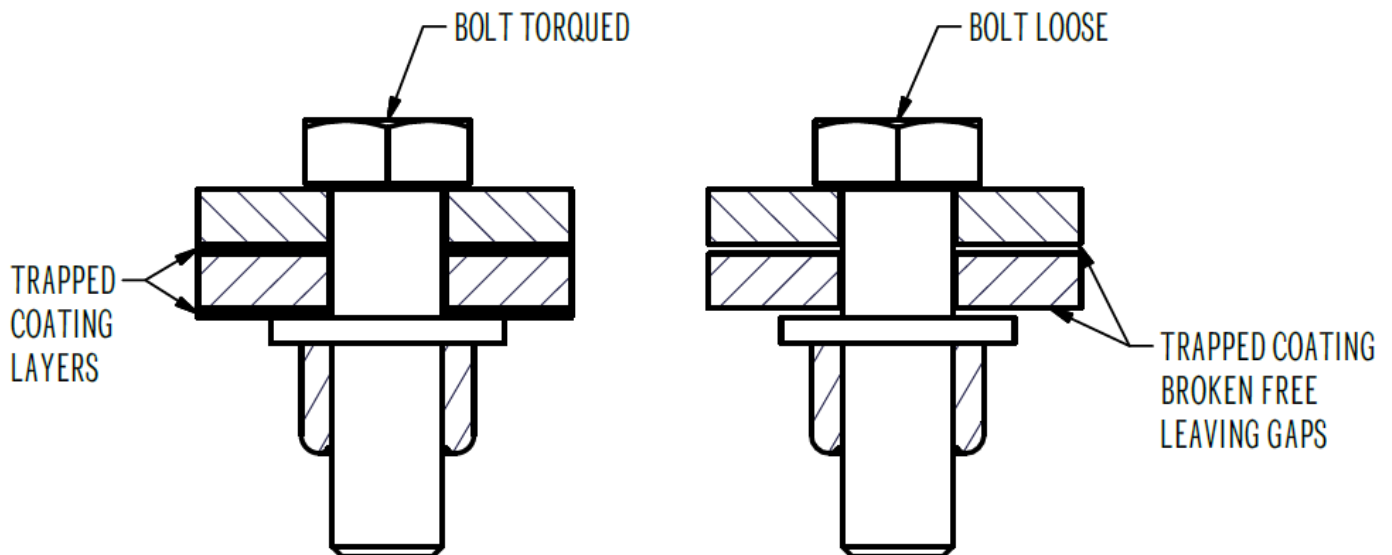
Cross-section of component bolted to chassis with trapped coating.
